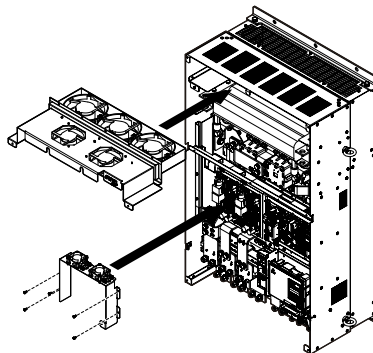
Install the Cooling Fan Unit: 4A0515 and 4A0675
